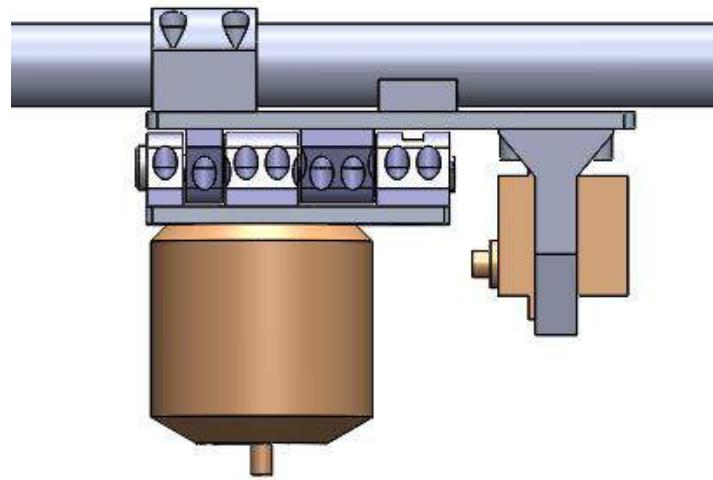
Installation of the rear motor tilt-actuation assembly on the carbon fiber tube connecting the fuselage to the tail of the plane.
